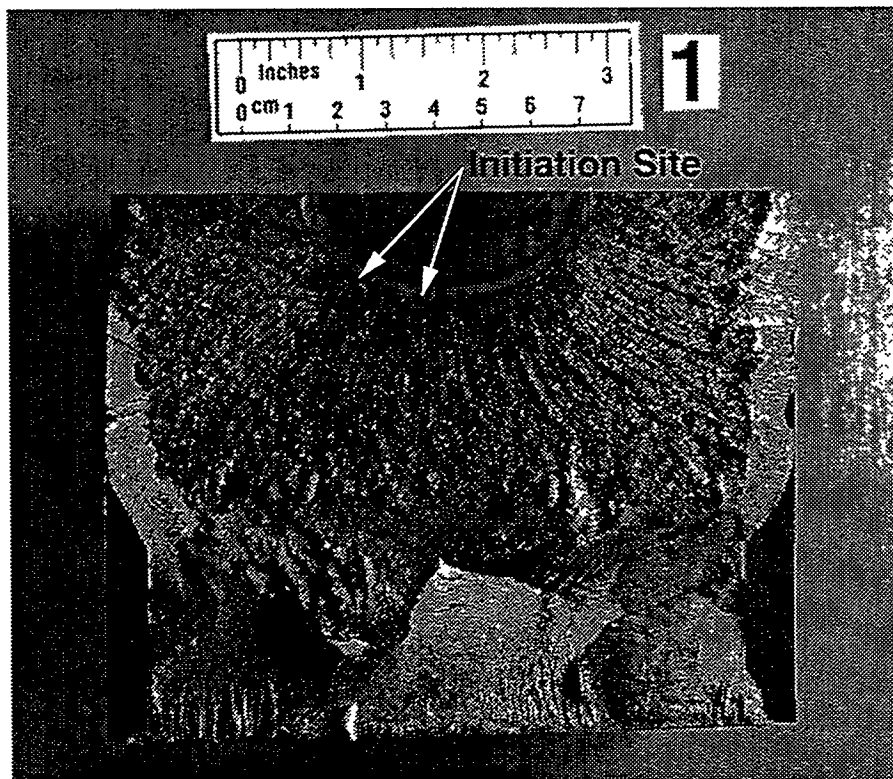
Fracture surface for finite-length flaw specimen CF-5 showing location of cleavage initiation site(s)
